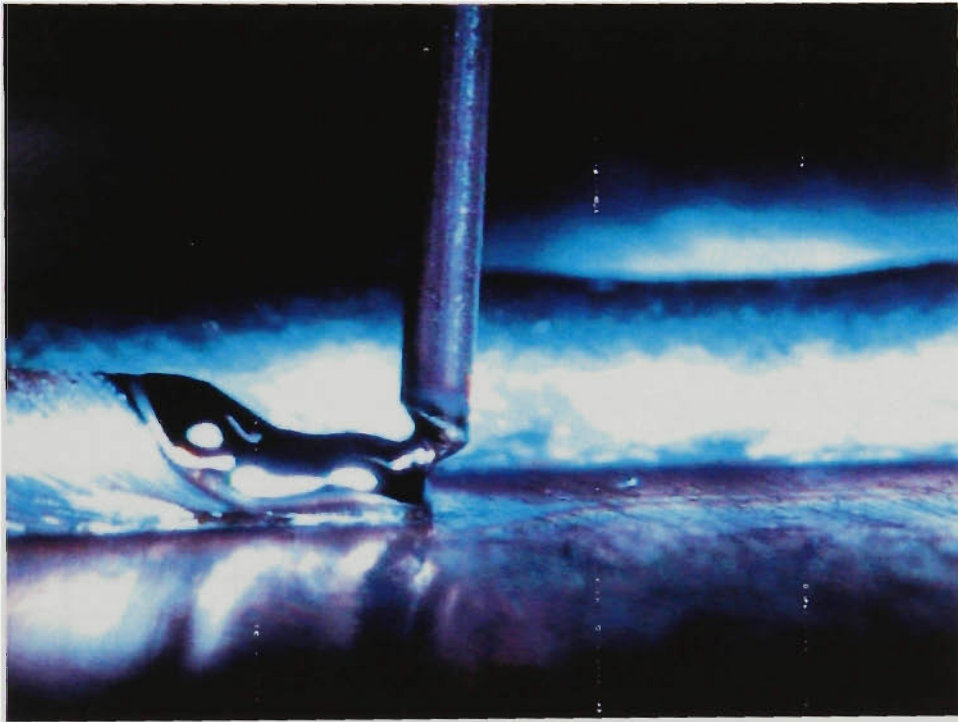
Photograph of weld prior to short circuit rupture
